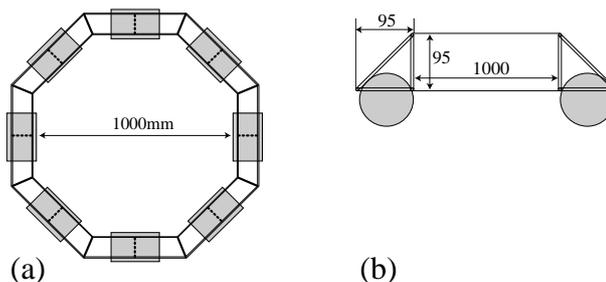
Schematic drawing of net cage frame ; top view (a) and side view (b) .
